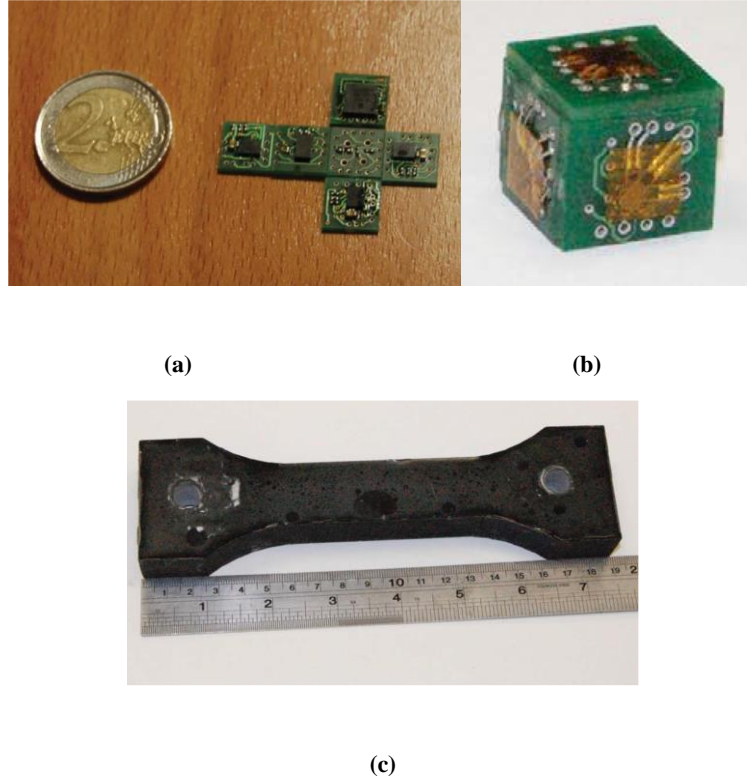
(a) Unpacked 3D module, (b) Fully assembled module, (c) Installation in the test specimen [30]
